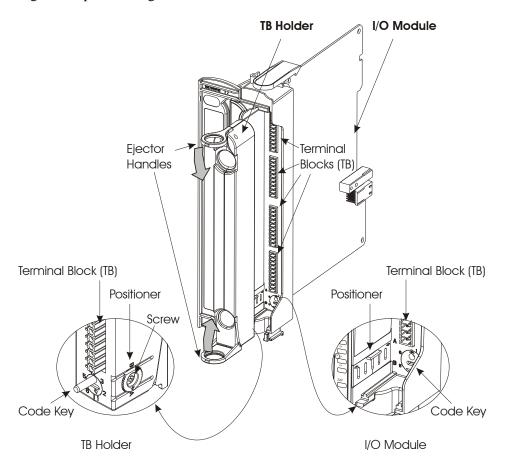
Terminal Block (TB) Holder on I/O Module - General View with Coding
